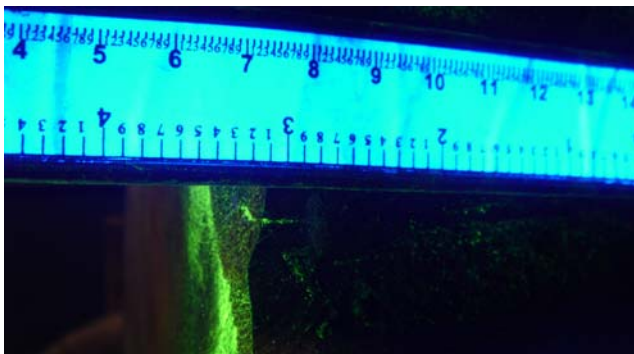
Defect Identified using Wet Fluorescent Magnetic Particle Inspection
